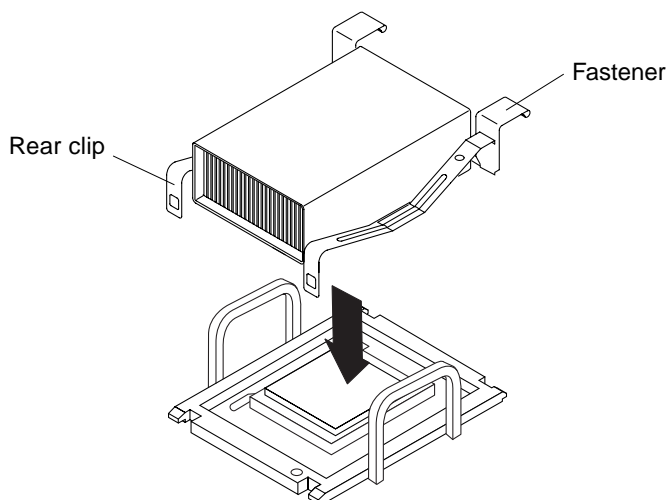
Replacing the Heat Sink on the CPU Socket
